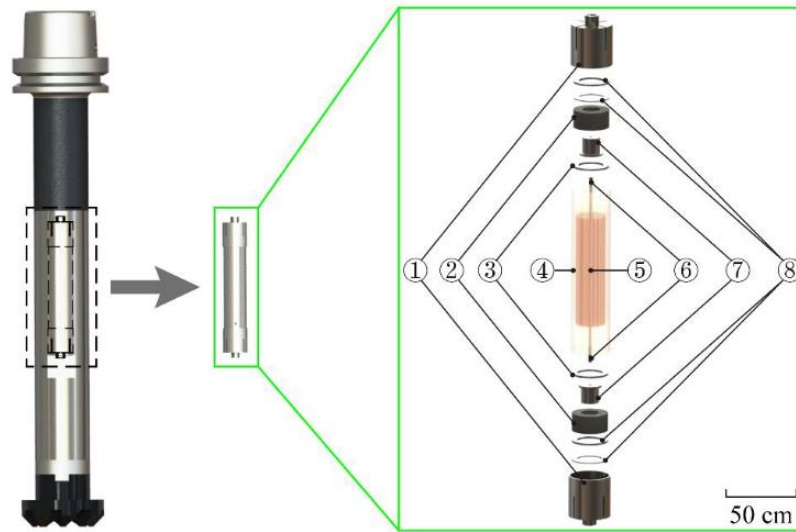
Milling tool embedded with passive damping unit. 1—end cover; 2—damping element; 3 and 8—gasket; 4—shell; 5—mass block; 6—steel rod; 7—support block (Ma et al. 2021)
